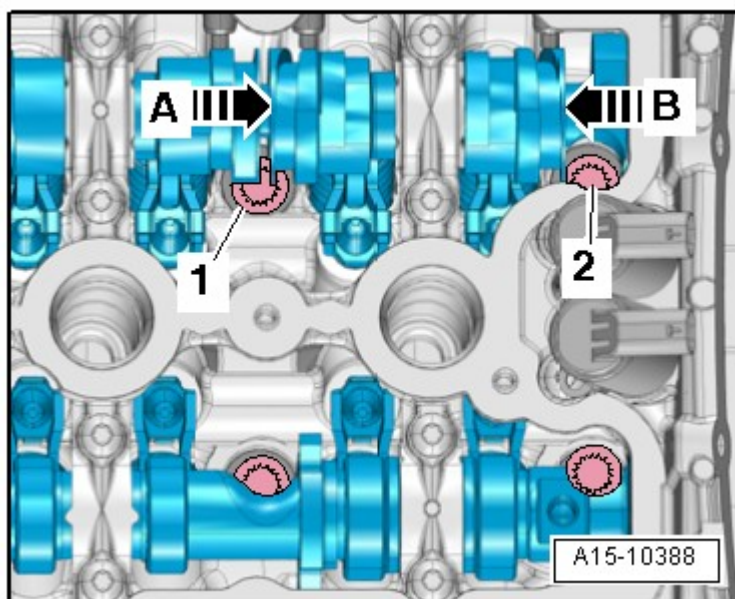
Intake Camshaft Partially Restrict Access To Cylinder Head Bolts, Such As Bolts Shown In This Example
